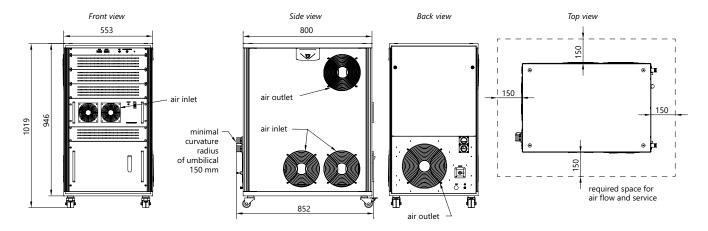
Outline drawings of Atlantic 25, 50, 80 power supply unit (dimensions in mm)
